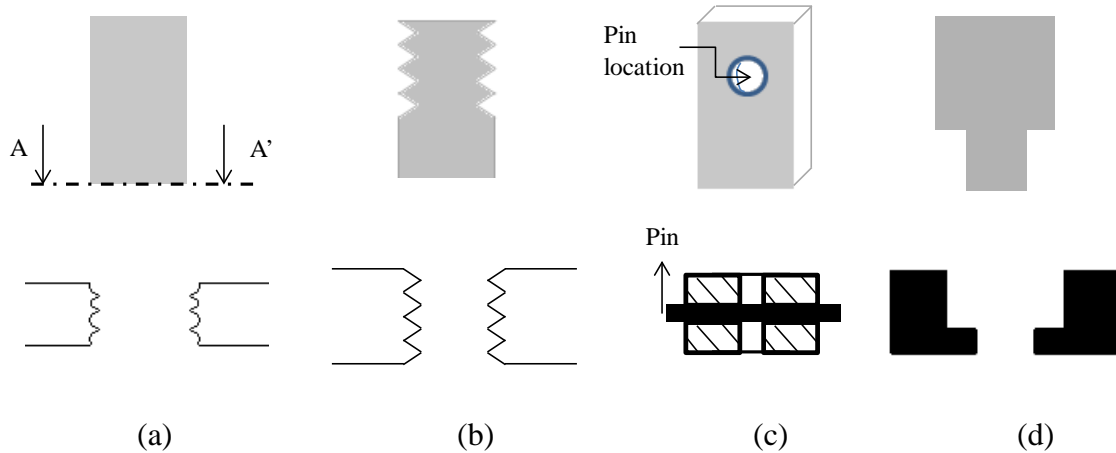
System for gripping tensile specimen (a) serrated grip (b) threaded grip (c) pin grip (d) solid collar grip
